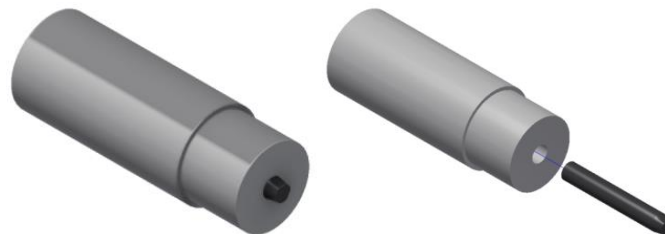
Standard Friction Stir Welding Tool
